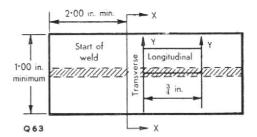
Dimensions for stitch and seam welding a macro test piecε
